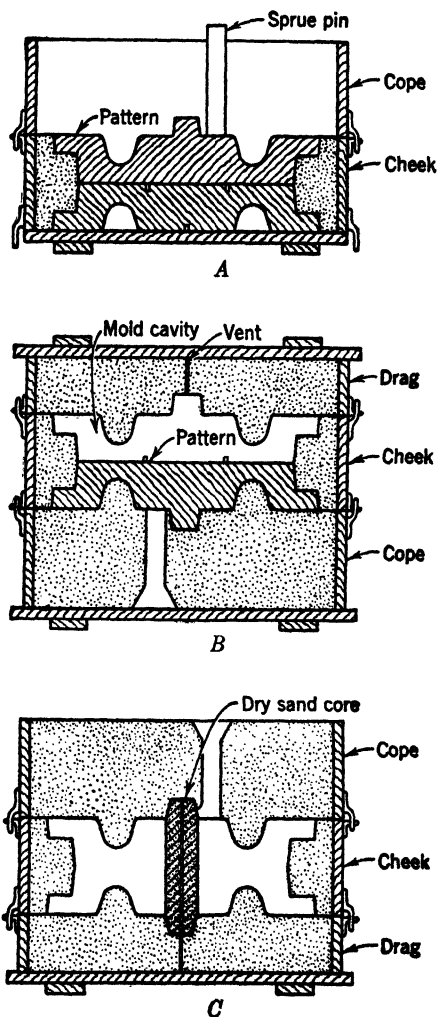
A. Molding of flanged pulley begins by ramming the two-piece pattern in the cheek. B. When the drag is completed, it is lifted off, the pattern is drawn, and the drag is replaced. C. Completed three-part mold of flanged pulley.
